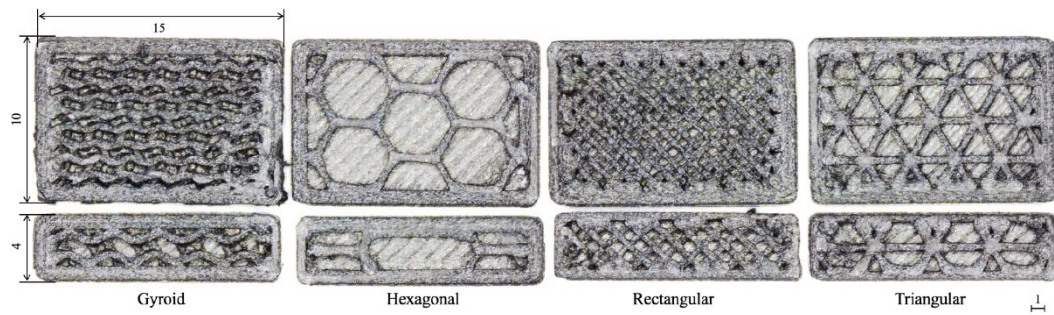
Dimensional analysis of the infill patterns (all dimensions in mm).
